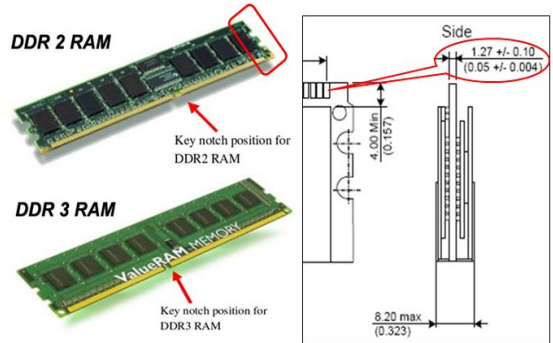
DDR memory module PCB design specification(DDR2 FBDIMM, HYNIX)
